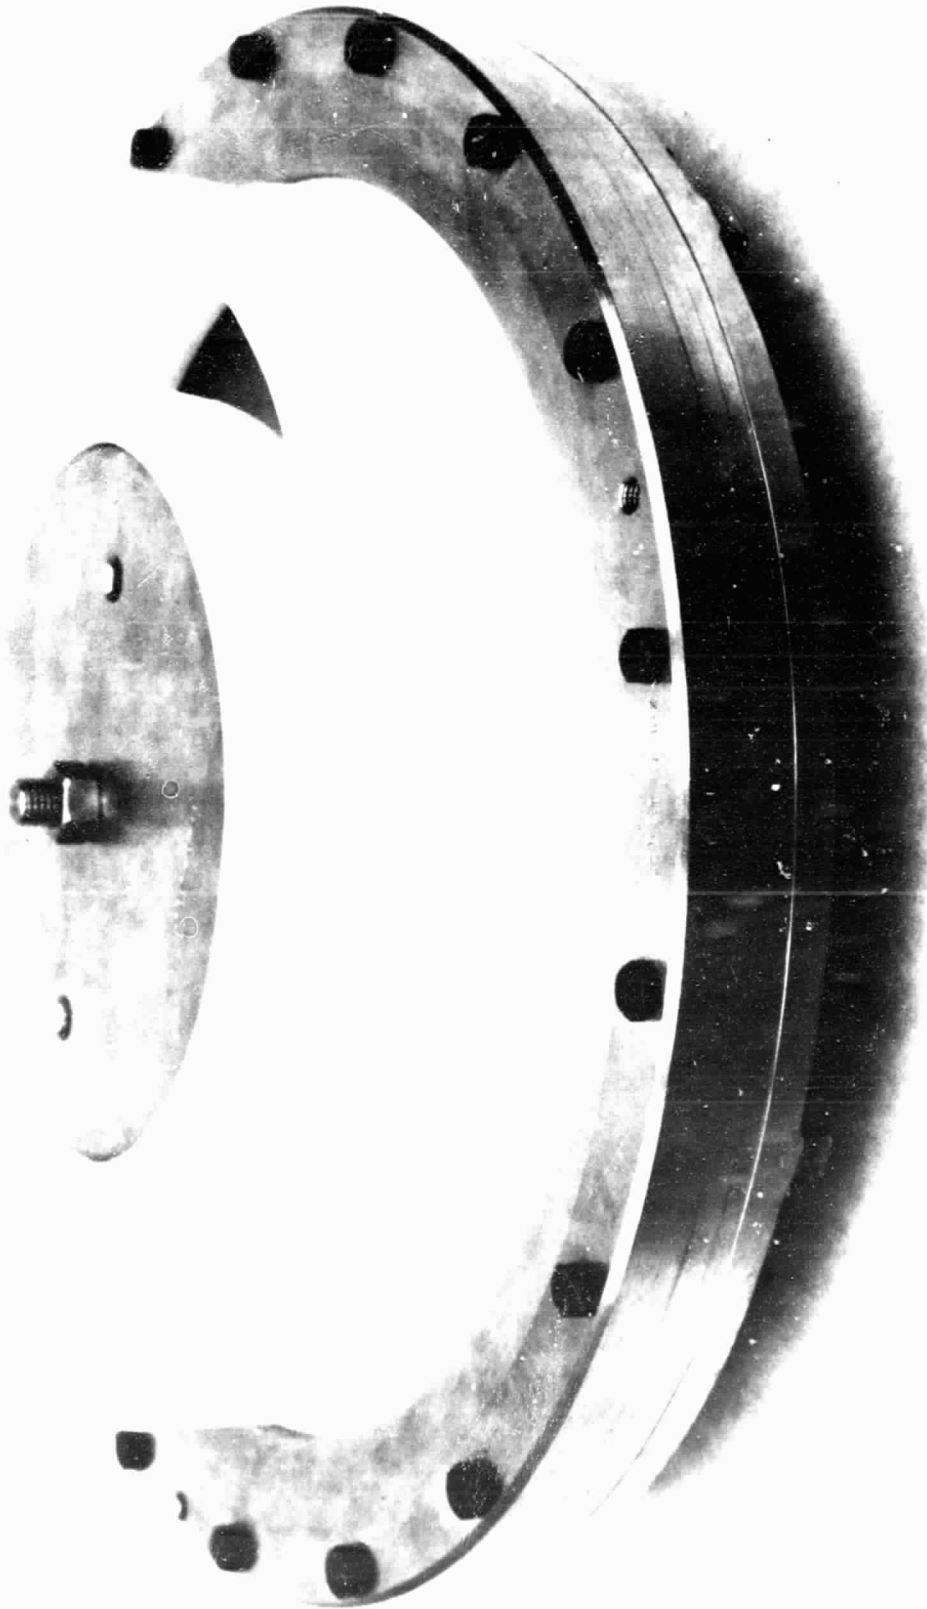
Flow Separator Housing Pressure Test Fixture Shown
